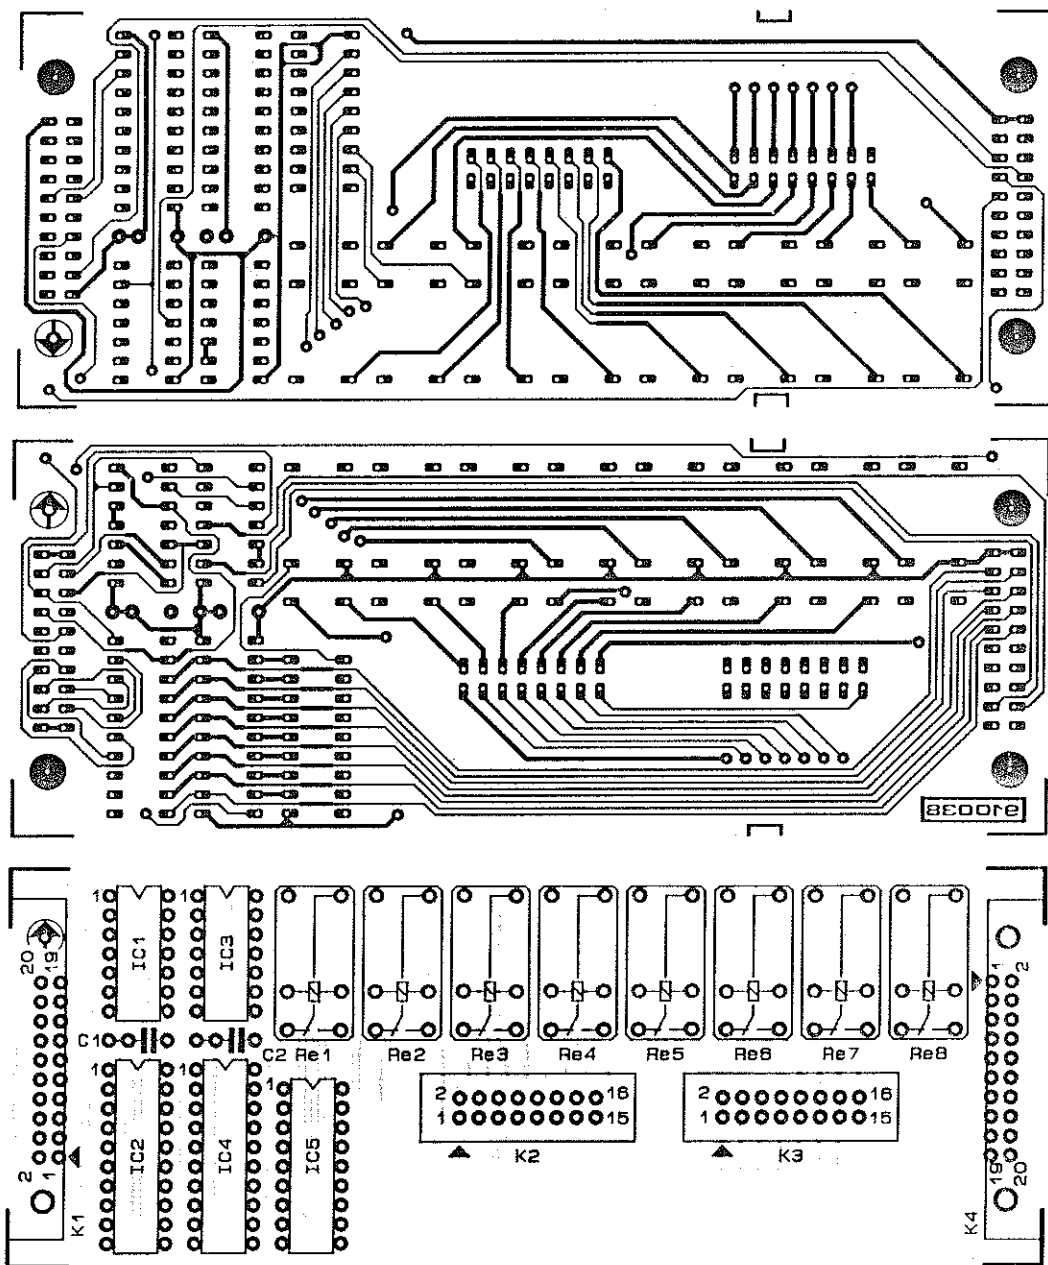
Printed-circuit board for the relay card. Note that this board is double-sided and through-plated.
